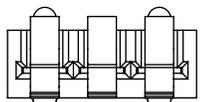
ALIGNMENT PIN OPTIONS (SHOWN: OPP-03-01-XX-S-AD)
